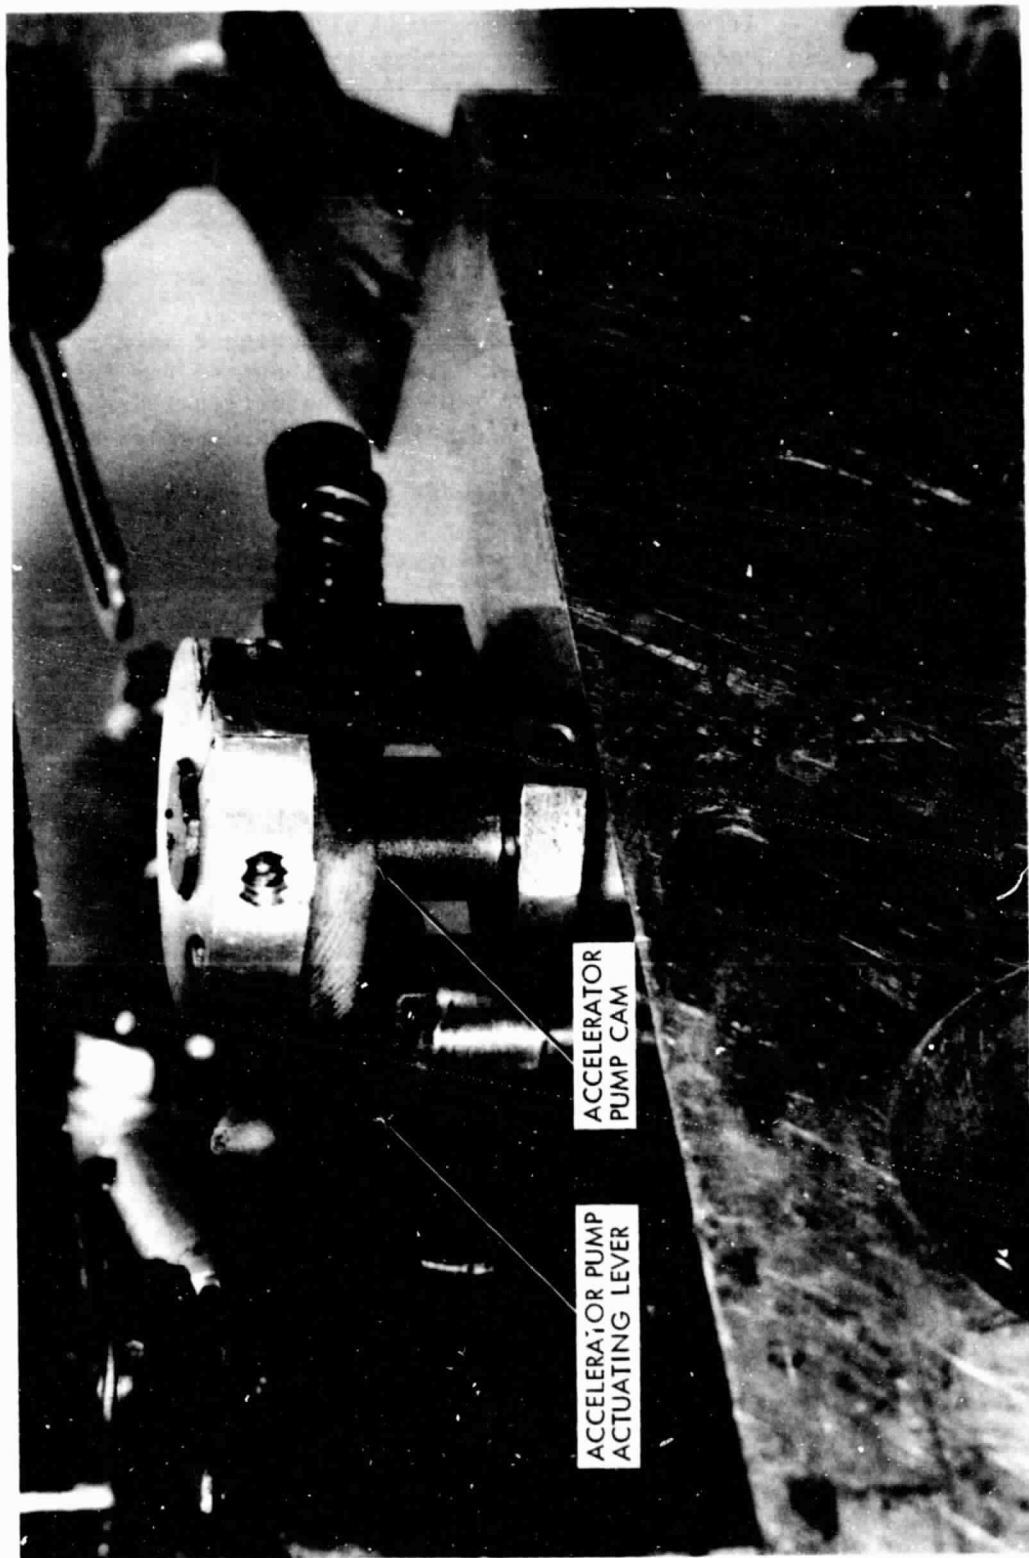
Micro-Carburetor Accelerator Pump Cam
